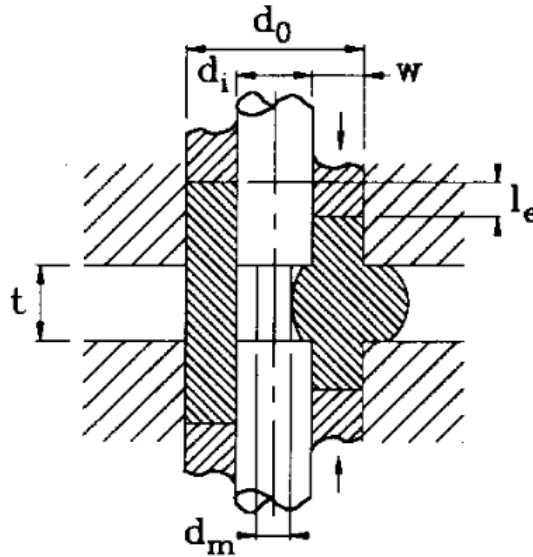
Die configuration of double-sided injection forging of tubes [52].
